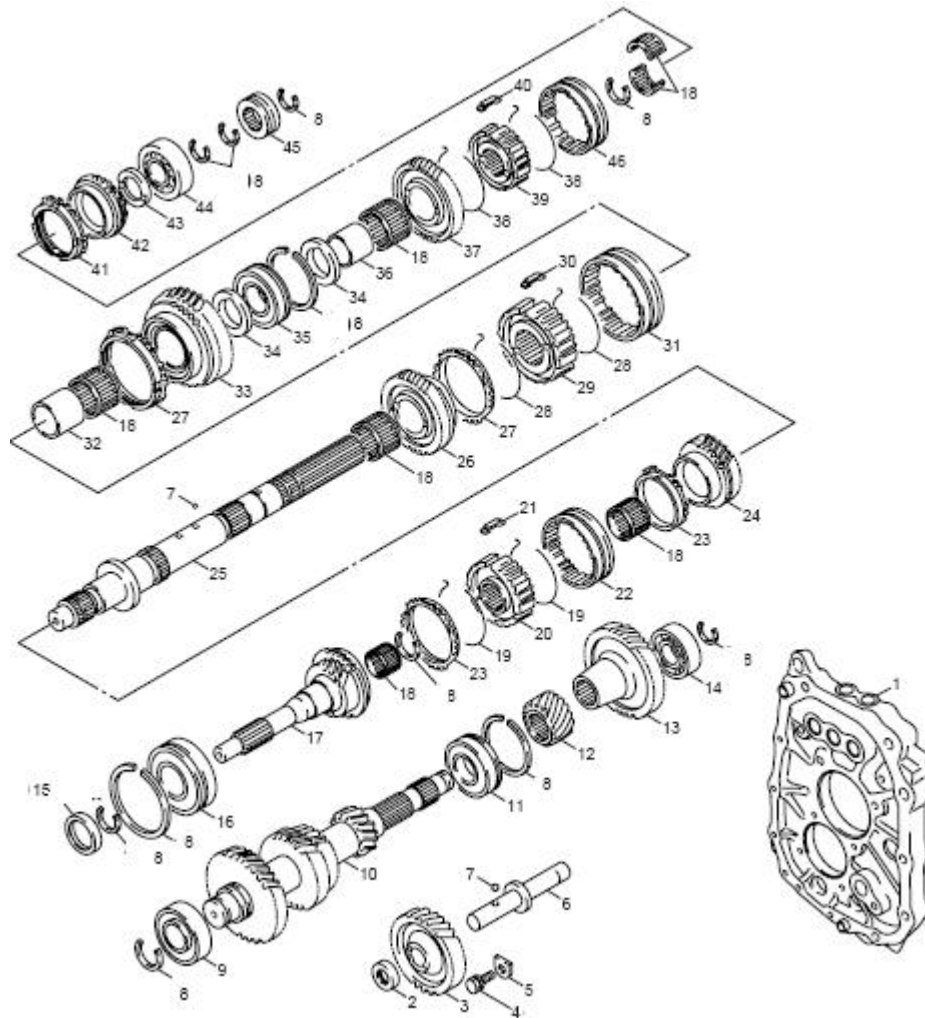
Input Shaft, Main Shaft, Countershaft and Reverse Idle Gear Shaft
